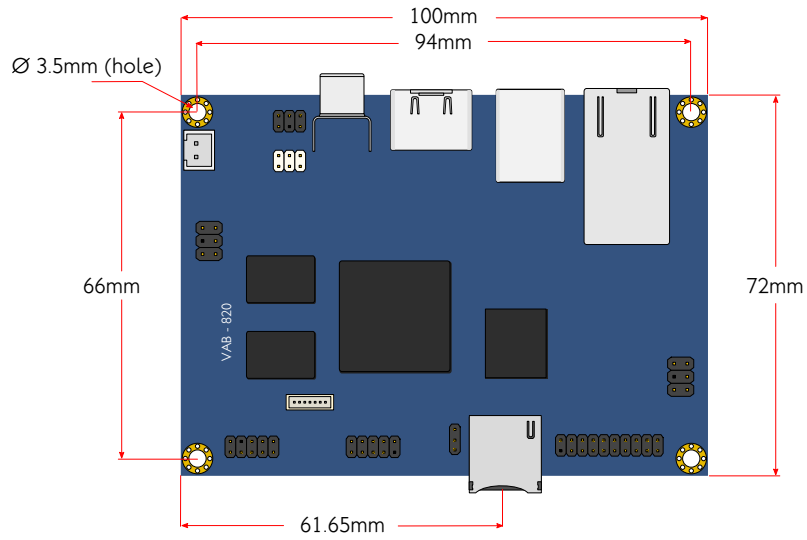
Mounting holes and dimensions of the VIA VAB-820 (top view)
